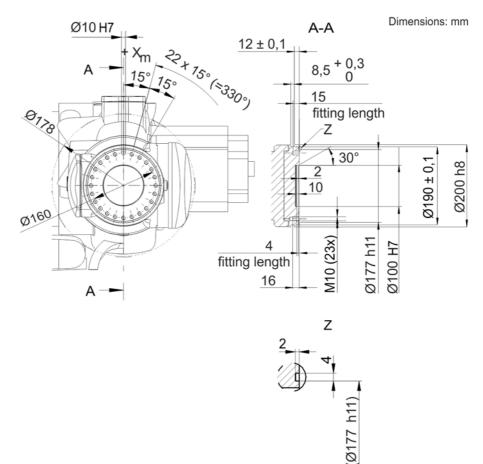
Mounting flange D=160 for F-HP in-line wrist
